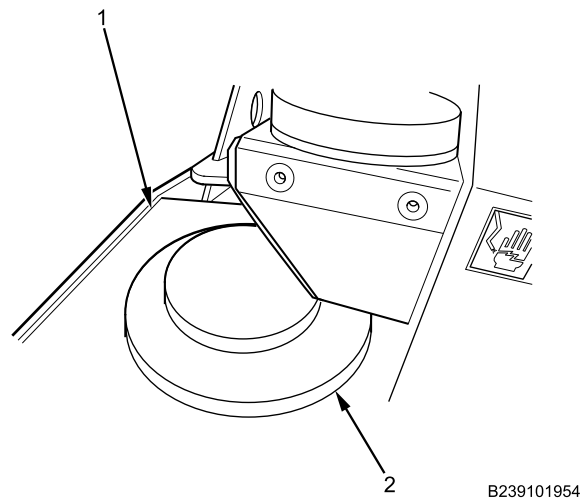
Overpressure Relief Valve Shield Assembly Mounting.
